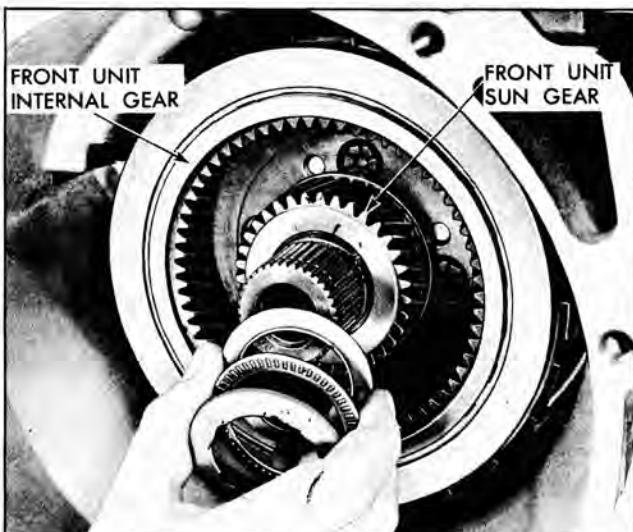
Front Sun Gear to Front Carrier Thrust Bearing and Races
